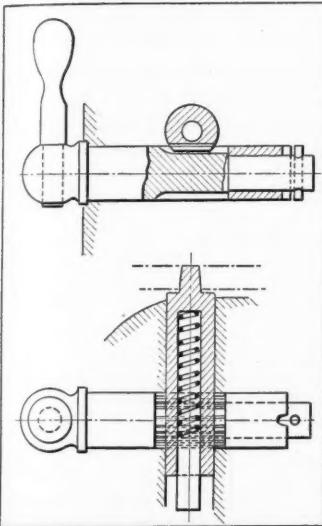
Withdrawing and Locking Device for Spring Plunger
